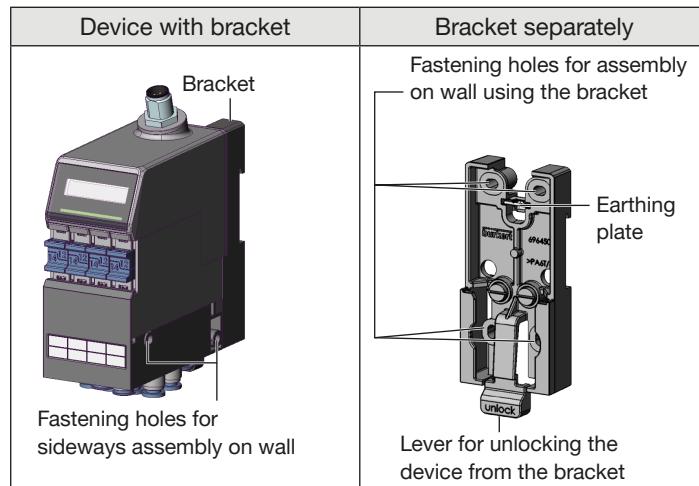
Assembly on wall for AirLINE Field Type 8653 field module
